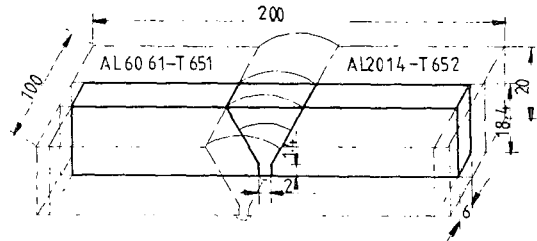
Position and Configuration of Specimen butt welded joint
